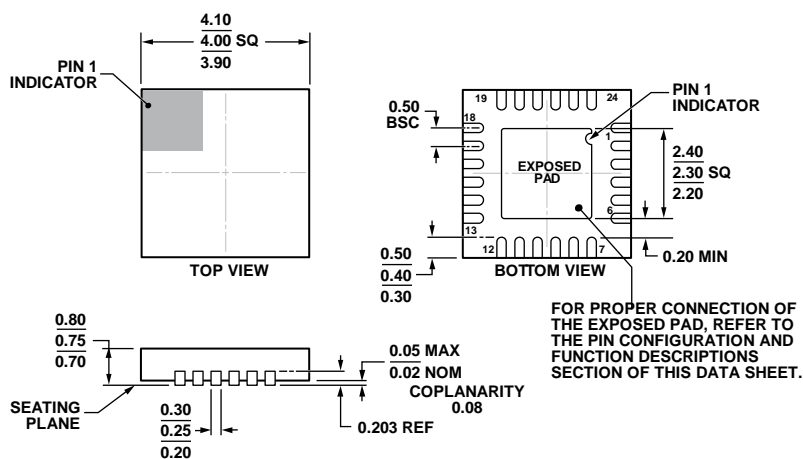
24-Lead Lead Frame Chip Scale Package [LFCSP]
